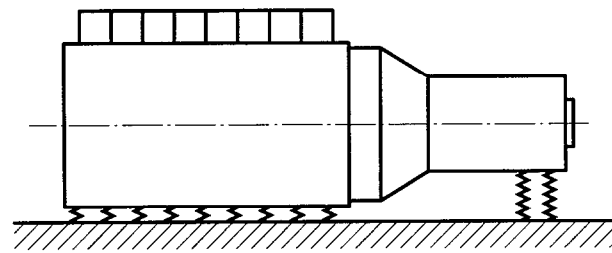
Assembly with flange housing and resilient mounting on the engine and generator
